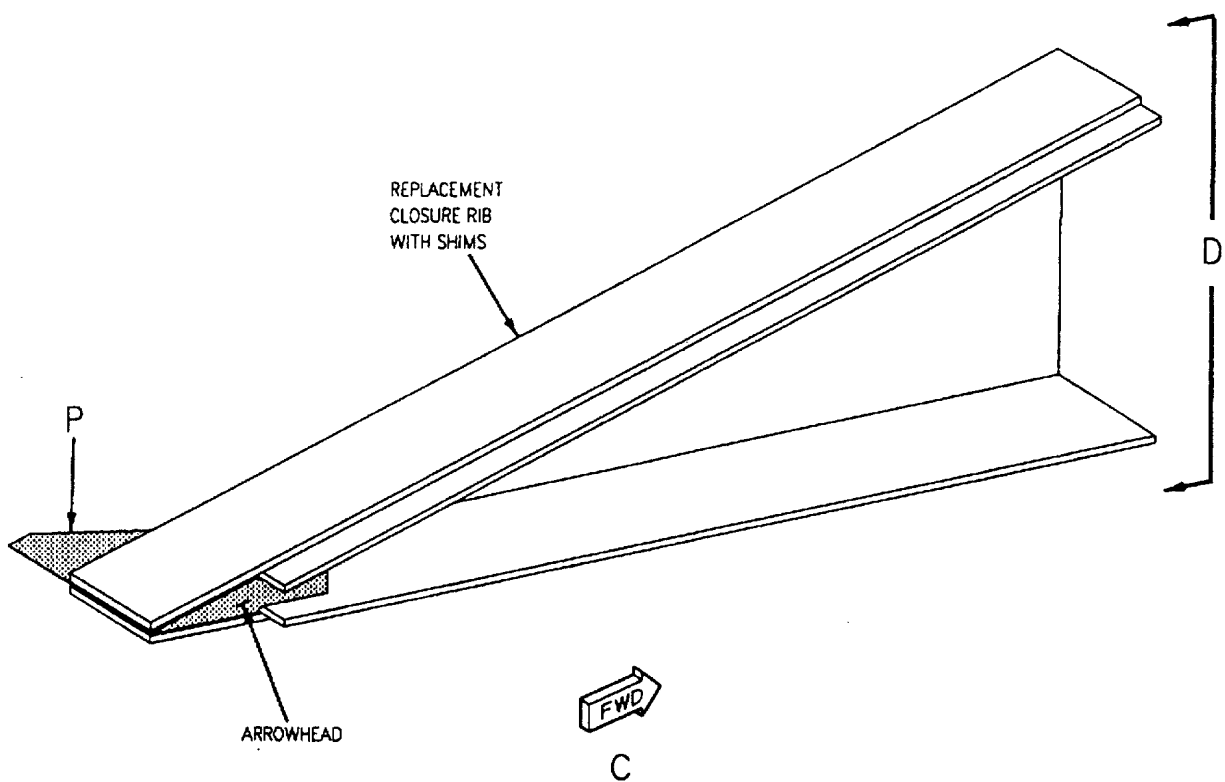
Inboard Aft Closure Rib and Skin Damage Repair (Sheet 4)
